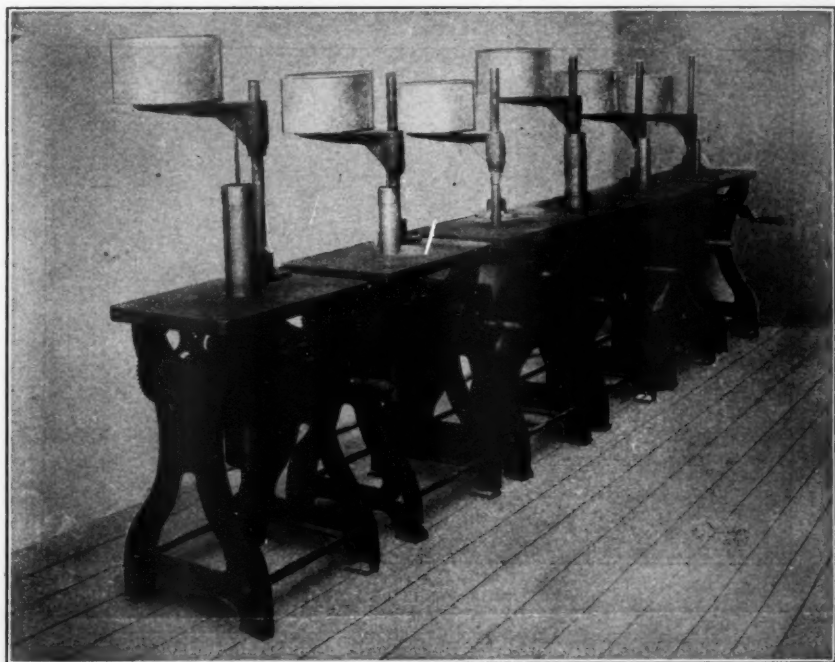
(a).—WADSWORTH JAR RAMMING CORE FORMING MACHINE.
